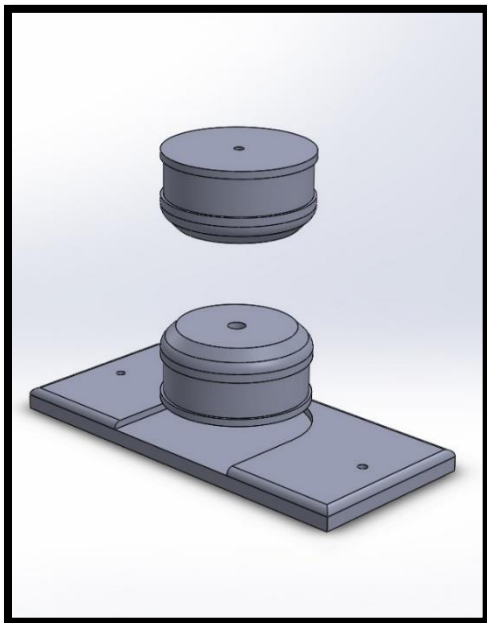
Cylindrical Clamp Assembly for Tube Specimen Testing
